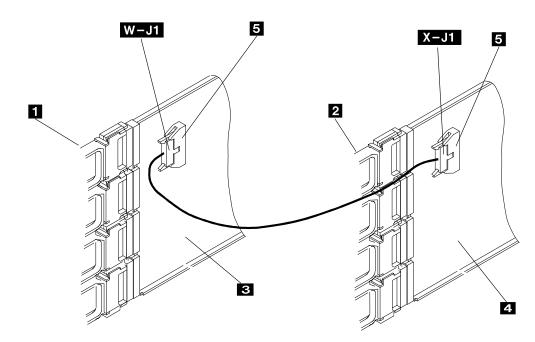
Cable 1 (PN 43G3180) Routing on a TSSB board
